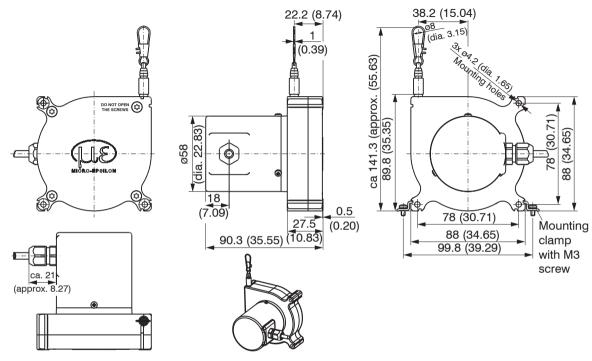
Dimensional drawing WPS- ... -MK88-CR, with potentiometer, dimensions in mm, not to scale
